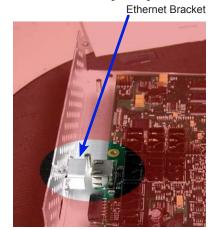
Guiding Main PCB Away from Ethernet Bracket
